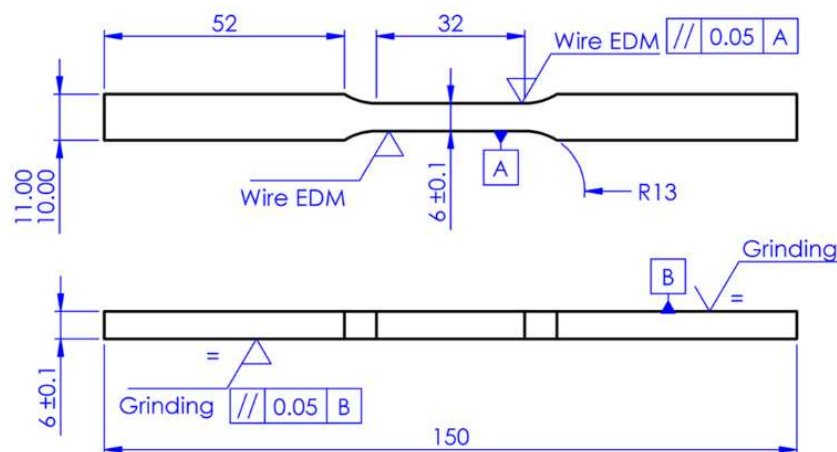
Test coupon geometry, dimensions and tolerances (in mm).
